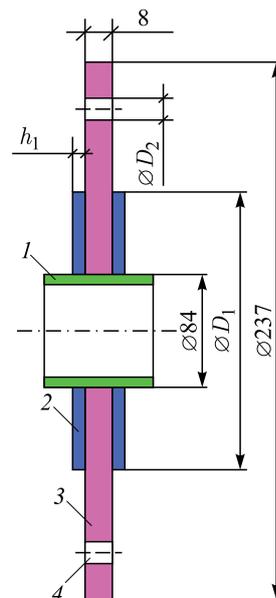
The design of the adapter, ensuring the absence of niobium intermetallic formations during welding: 1 — niobium tube; 2 — titanium claddings; 3 — stainless steel plate; 4 — holes
